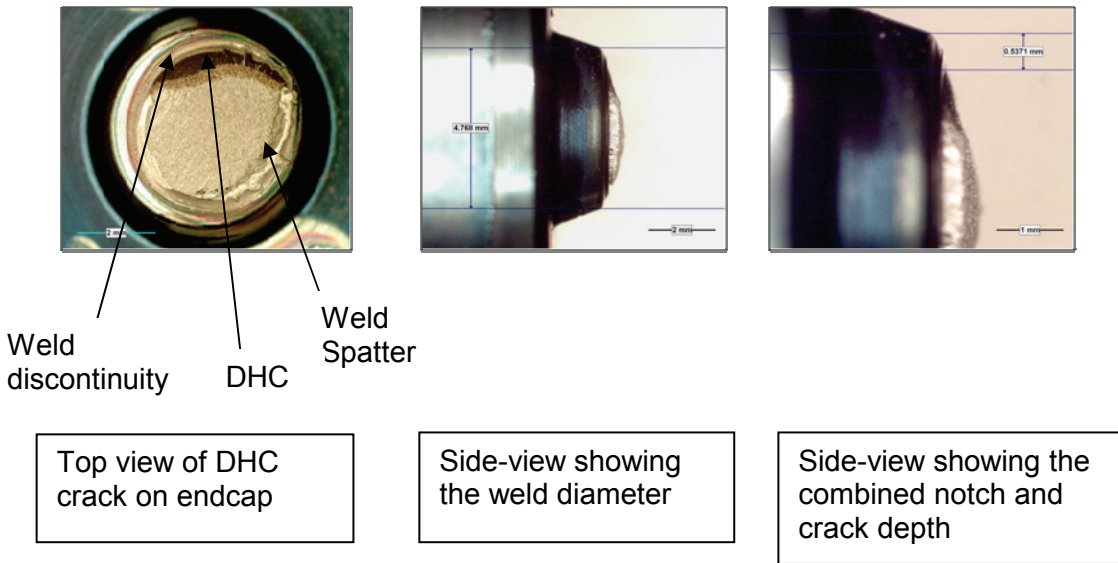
Fracture Surface on the Endcap after the DHC Test to Illustrate the Appearance of the Weld Discontinuity and Weld Spatter (Commissioning Test 07-104)
